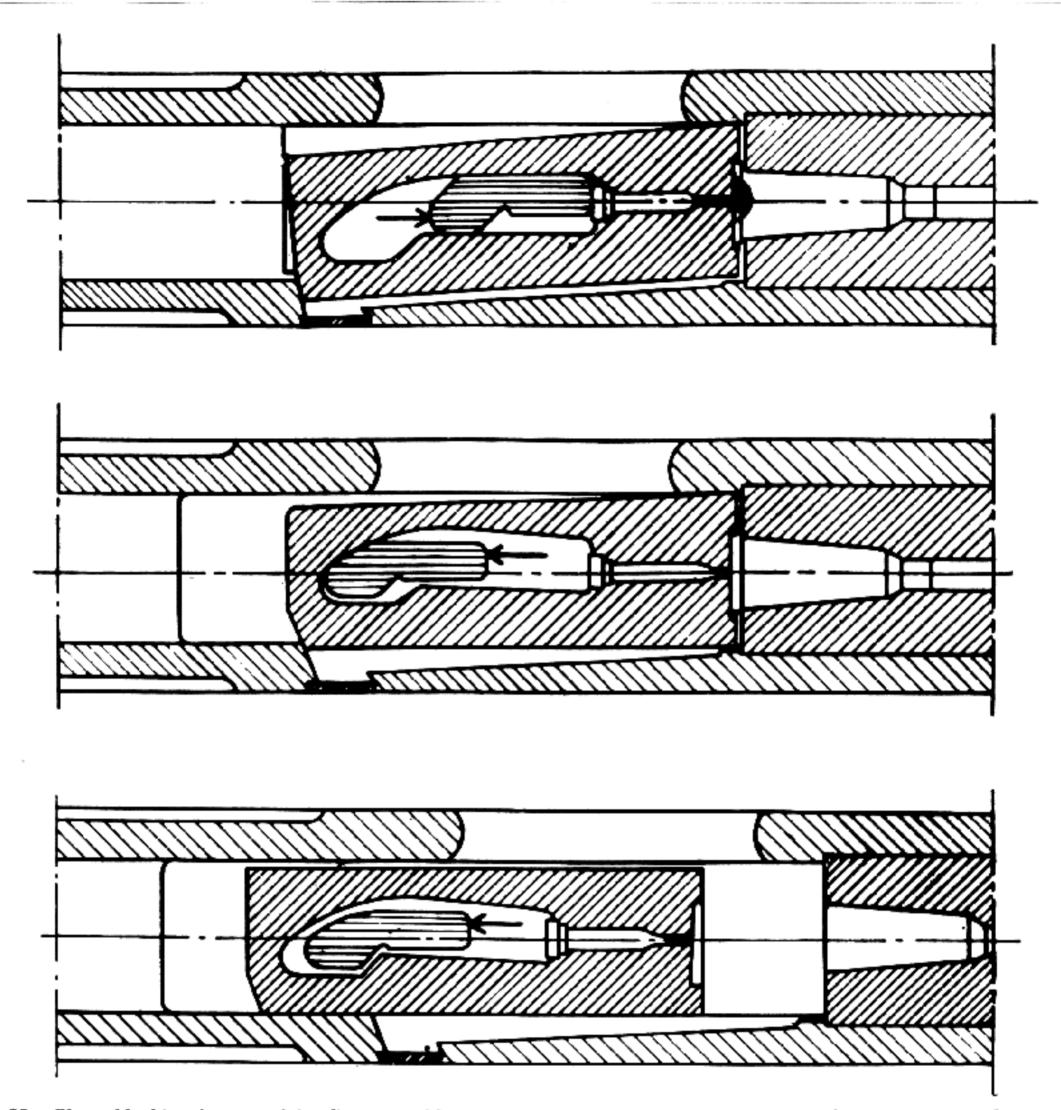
Plan of locking feature of the Goryunov Machine Cun. The steps shown are, top to bottom: ignition phase; unlocking; rear stroke.
